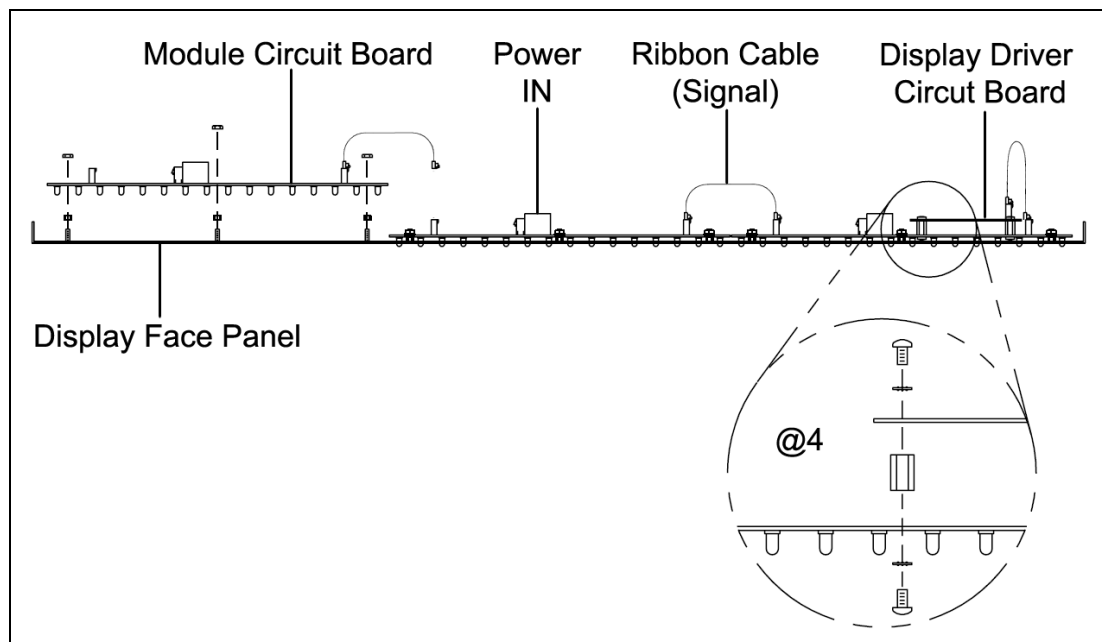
Replacing a Module or Driver, Top View (0.75" Mods Shown)
